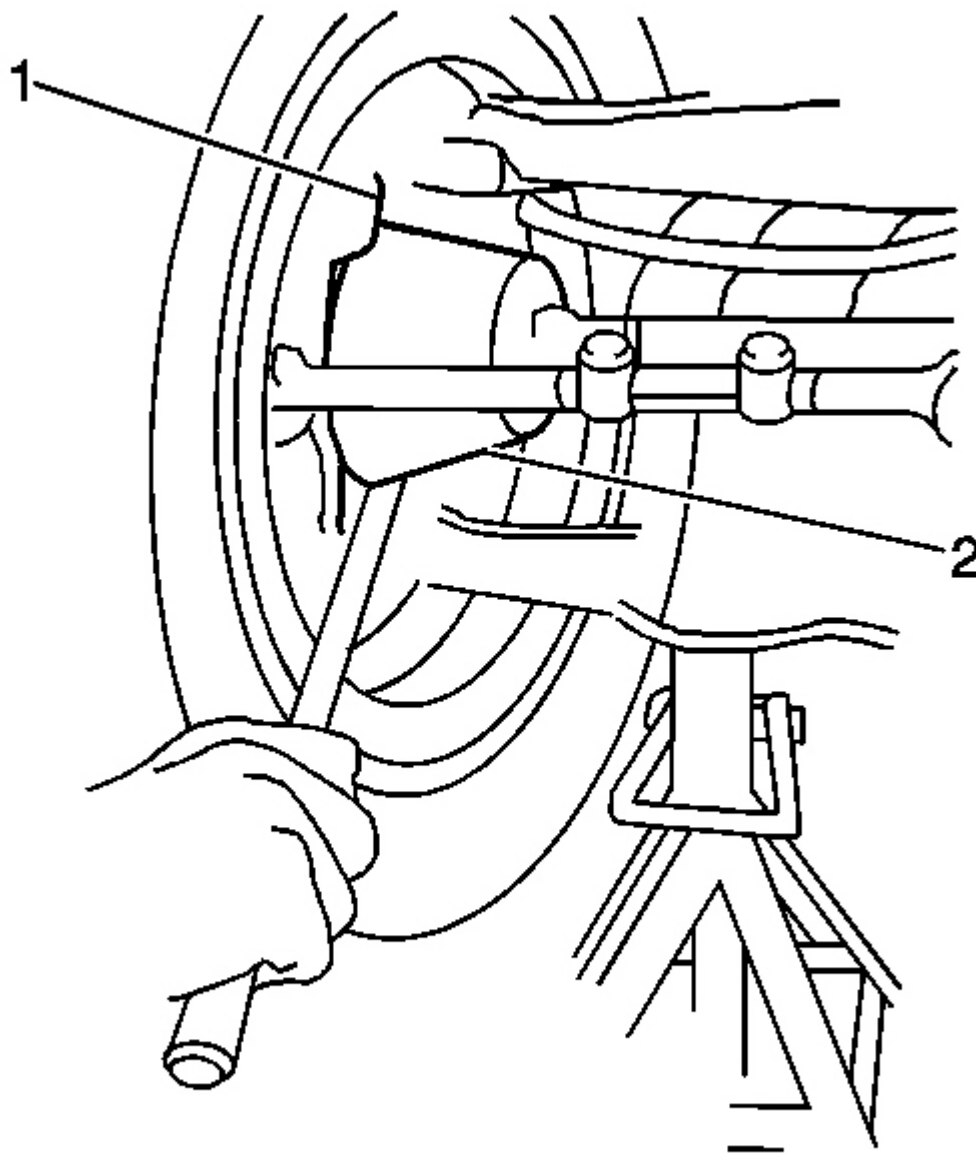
Prying Between Lower Control Arm & Outer Bearing Race
